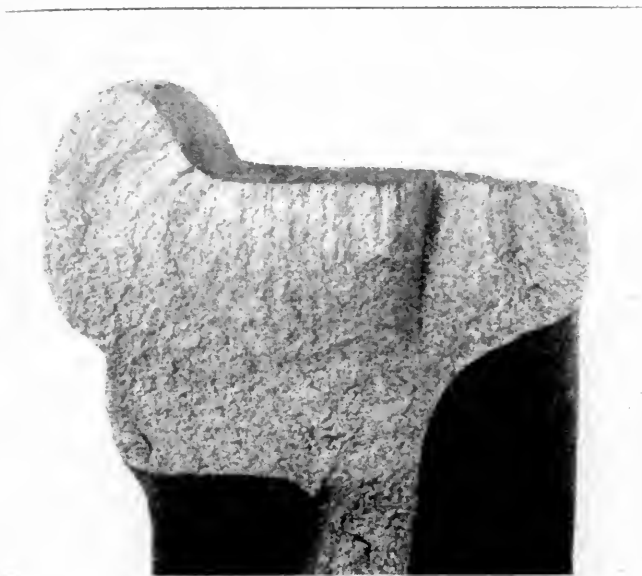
Tread Section of a 1909 M. C. B. 675 Lb. Wheel
